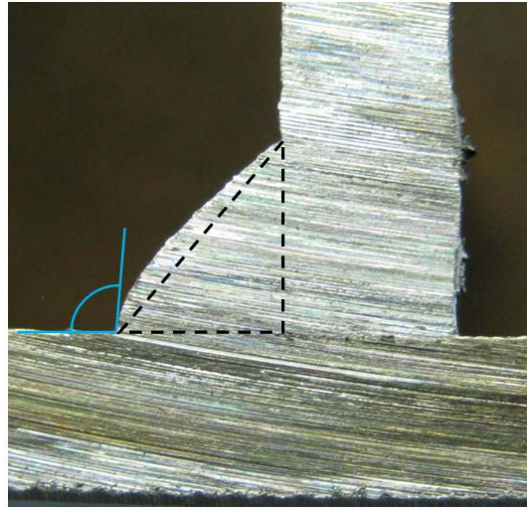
A Cross Section of Weld Bead in No-Root Opening Experiment
